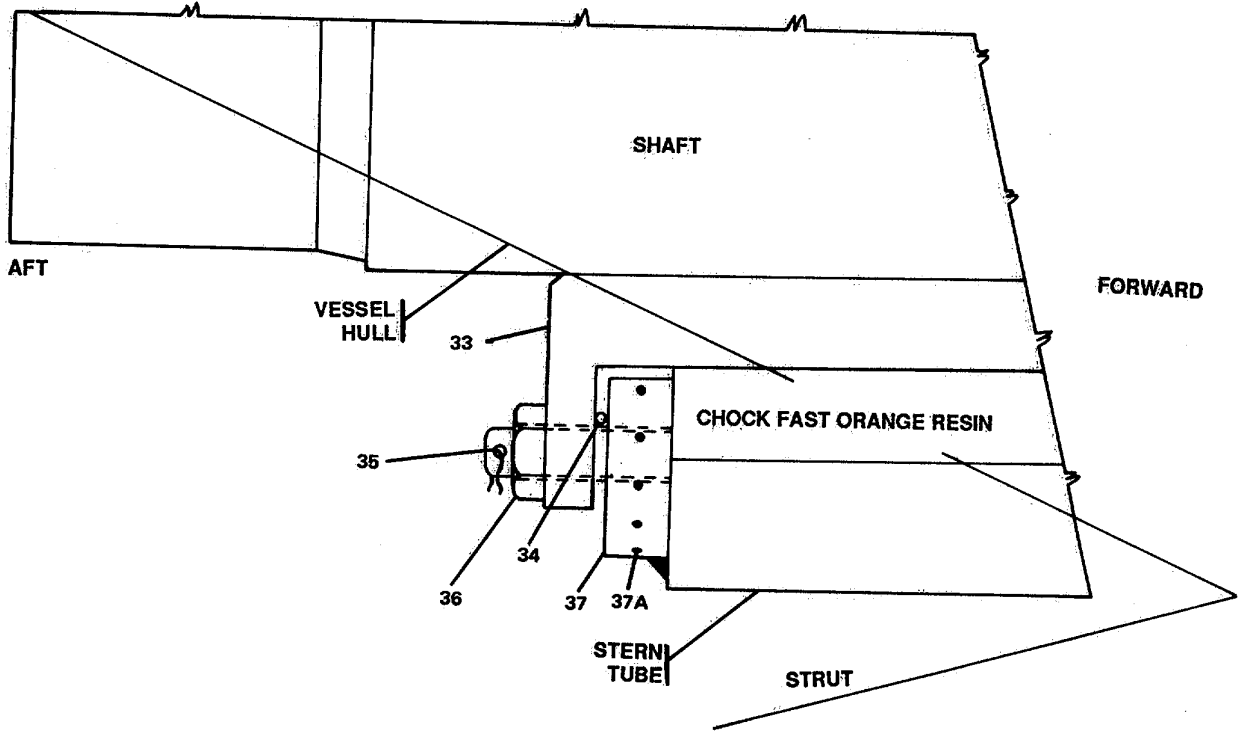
Propeller Shaft Assembly (Sheet 3 of 5).
